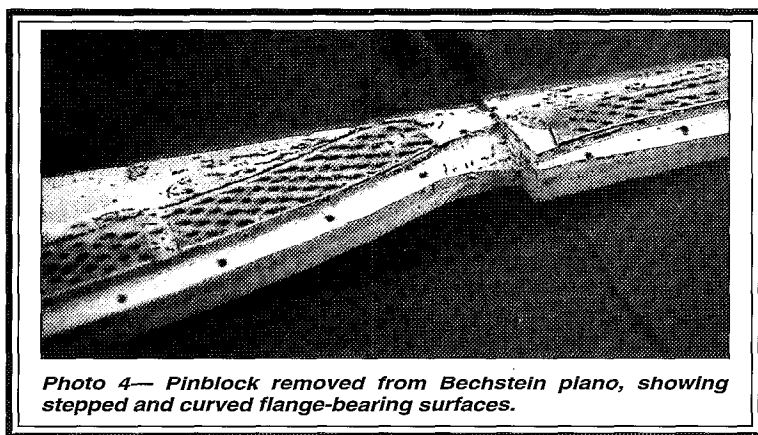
Pinblock removed from Bechstein piano, showing stepped and curved flange-bearing surfaces.
